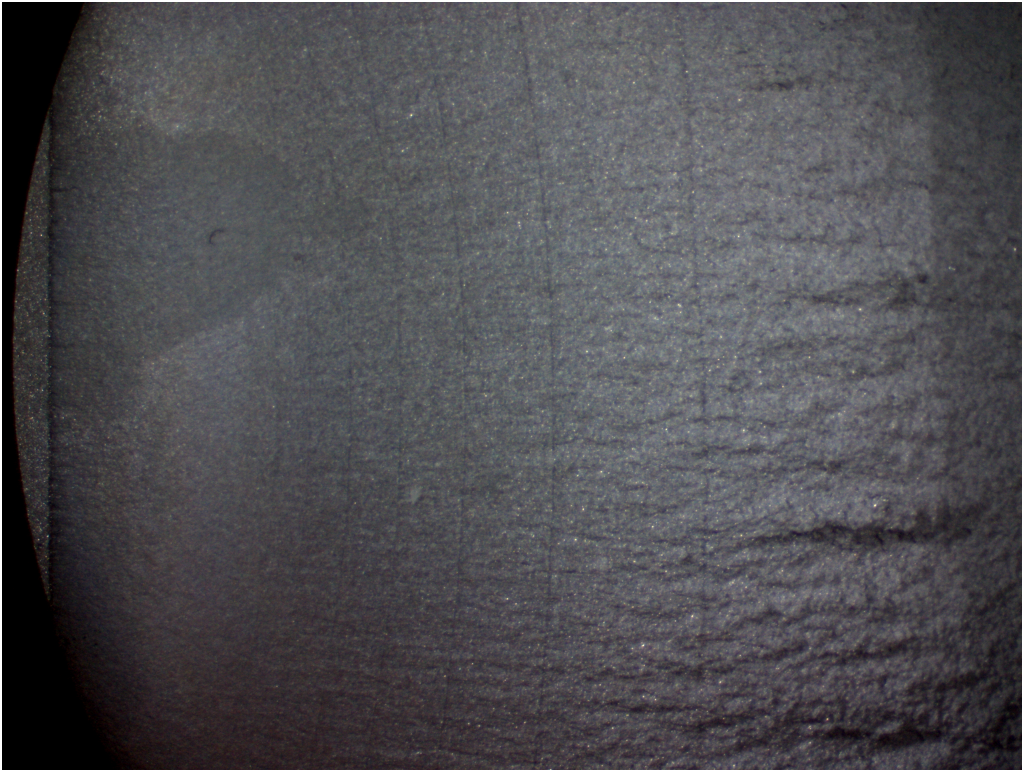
Picture of the fracture surface of specimen 2Z06.
